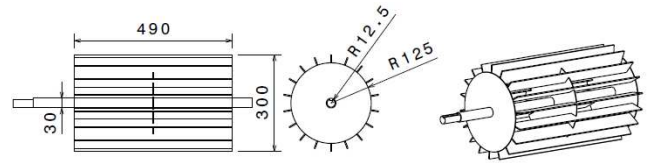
Views drum beater (A-right view, B-Front view, C-Isometric view) (all dimensions are in mm).
